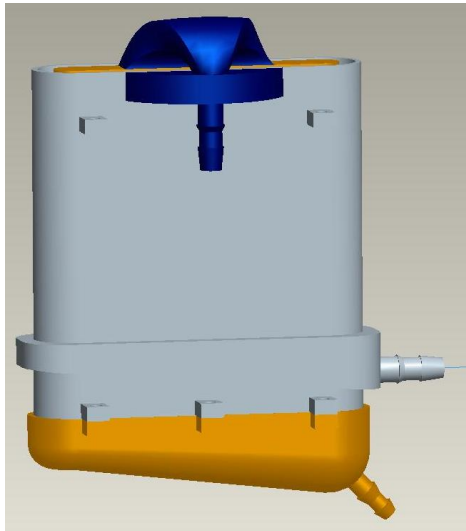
ProEngineer model of the assembled components of the mark II oxygenator device design.
